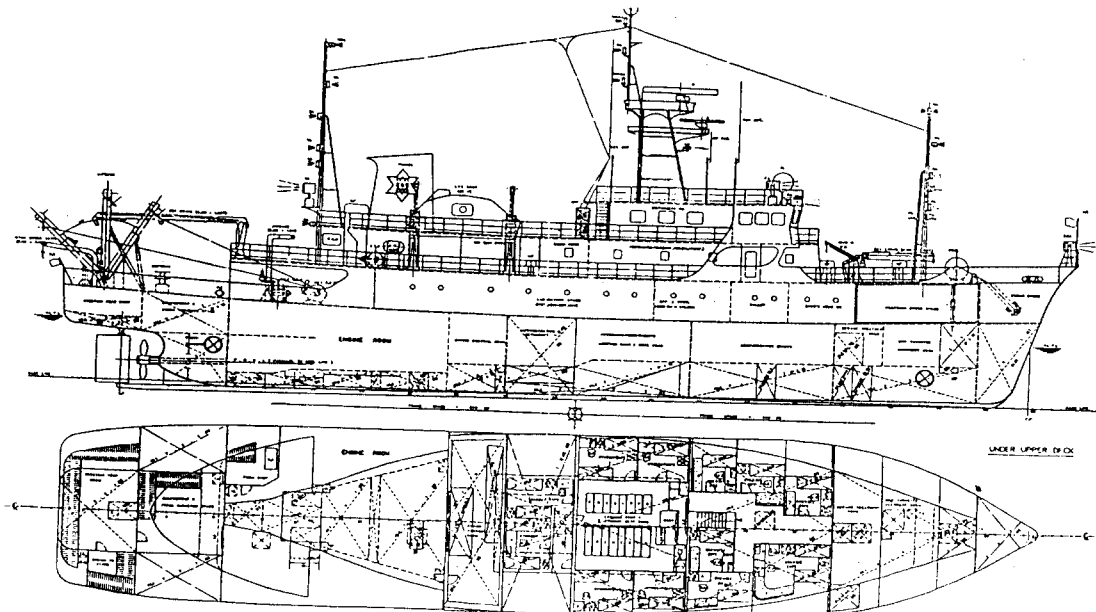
Side view & under upper deck plan of the M.S. TAMYANG
